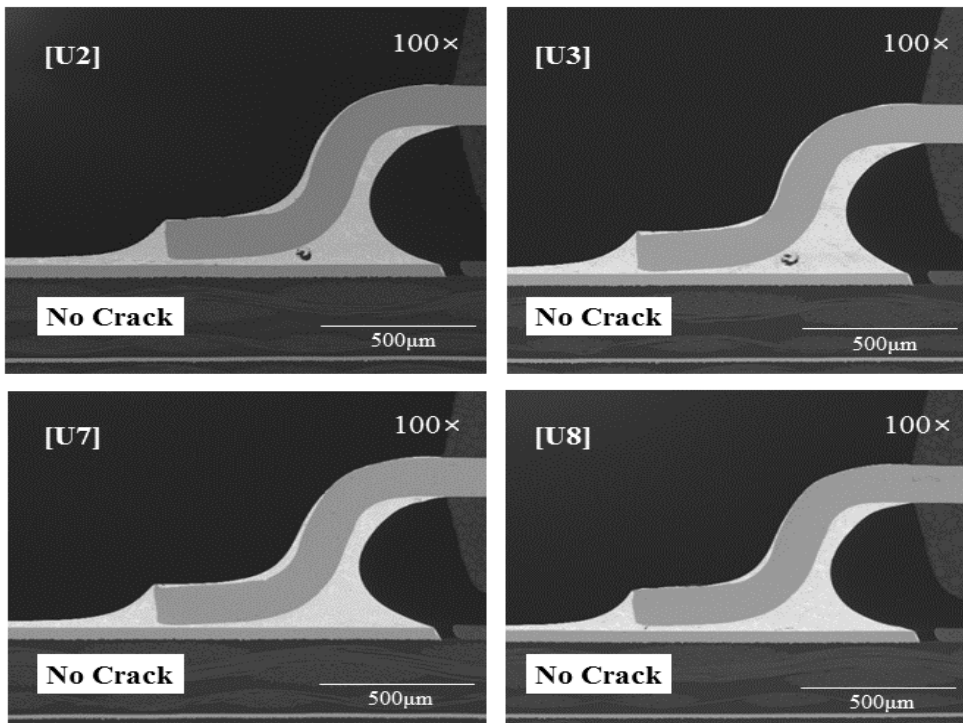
SEM Images of Leads and Solder Joints of TSSOP After Vibration Test of 2nd PCB Specimen
